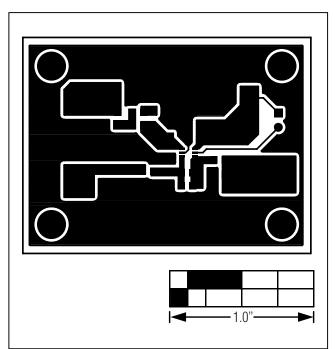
MAX9613 EV Kit PCB Layout—Component Side
